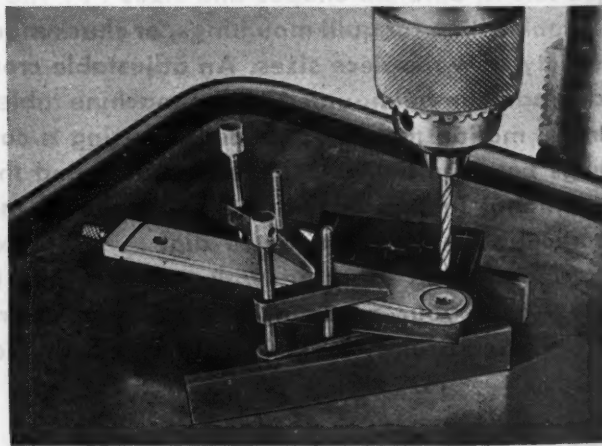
Holder and Drill Bushing of Set Shown in Fig. 1 Clamped to Work for Drilling Hole
